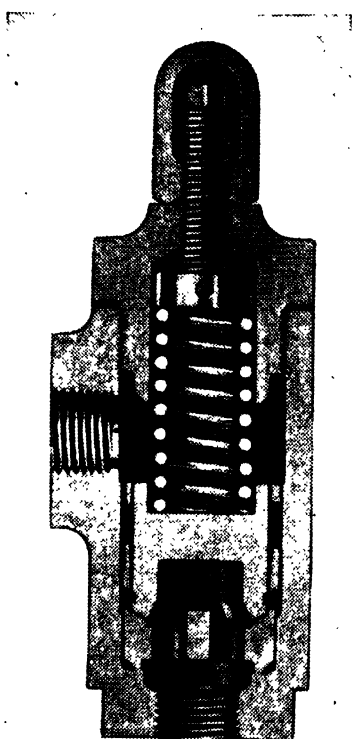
Oilgear foot-valve-type relief valve. (The Oilgear Co., Milwaukee, Wis.)
